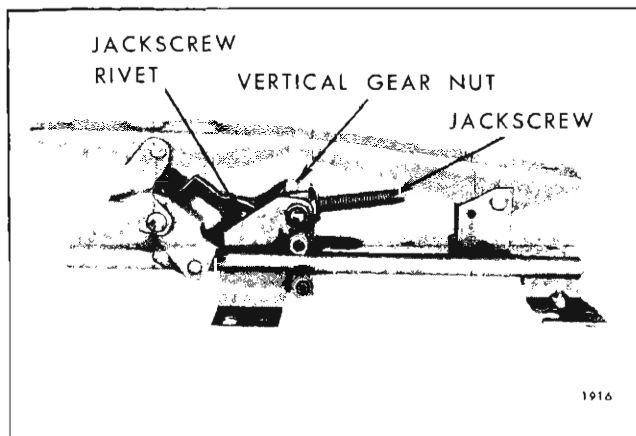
H8—Front Seat Adjuster Four-Way Tilt
